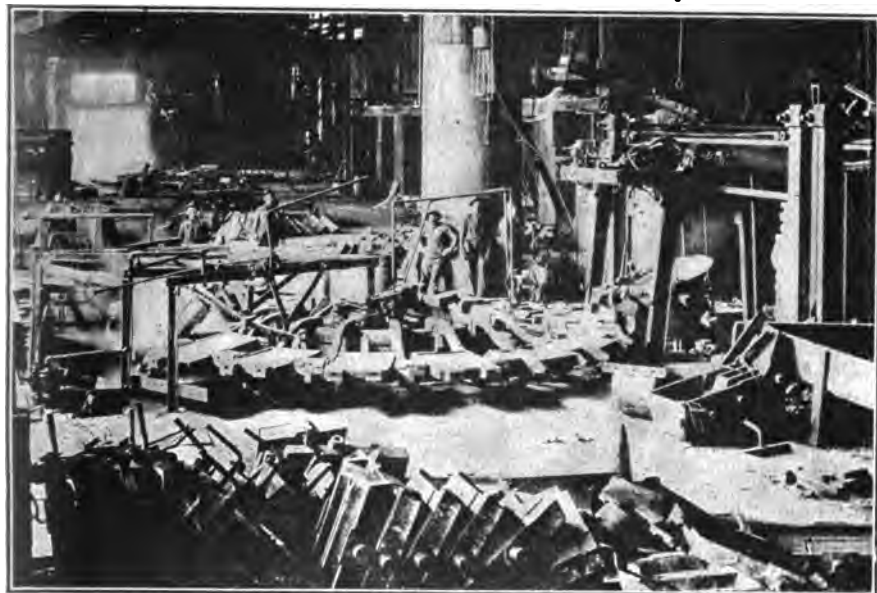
EARLY ARRANGEMENT OF CASTING MACHINE.
